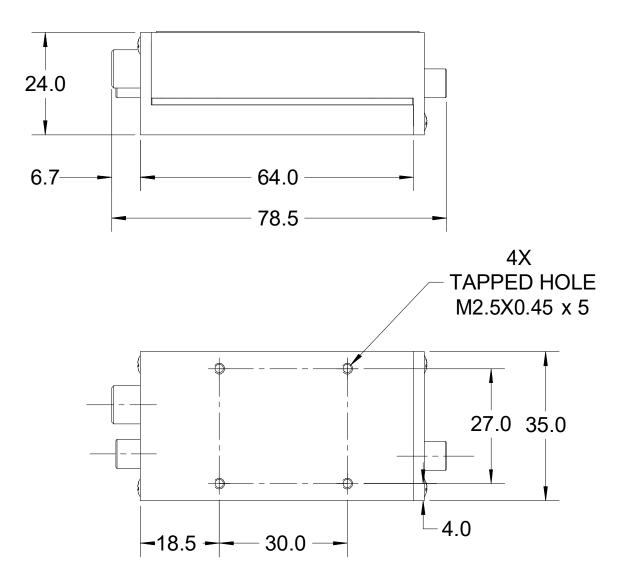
CP15 underside (showing mounting holes) and side views. Dimensions mm.
